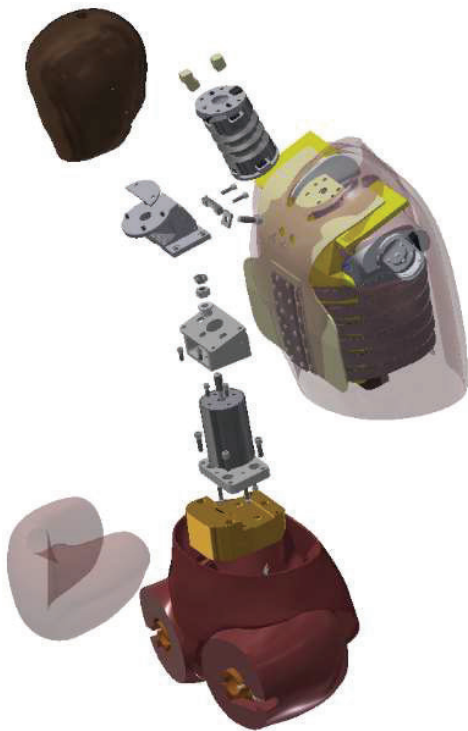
PTW rider dummy bespoke components (Use standard Hybrid III 50 parts to complete the assembly).
